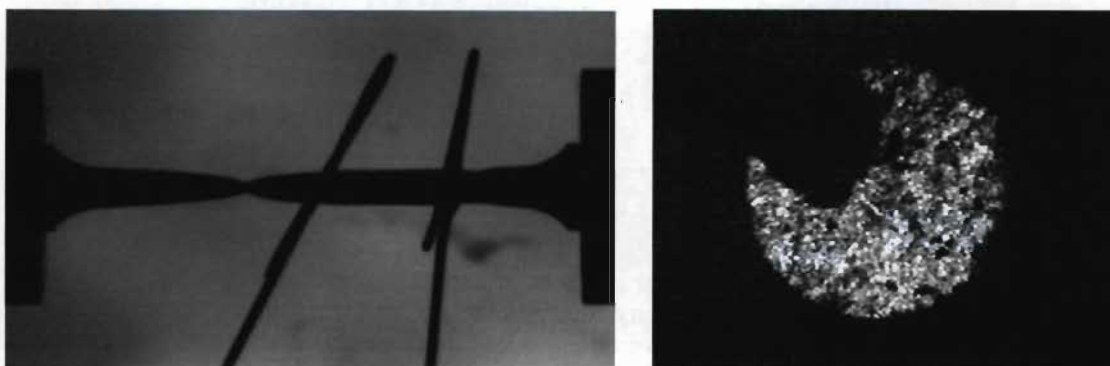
Left: Photo of plutonium tensile sample tested at 190C, 0.1/s as seen through the videoextensometer. This sample necked outside of the flags. Right: Fracture surface of the same specimen showing a large off center void that is strongly suggestive of a preexisting defect
